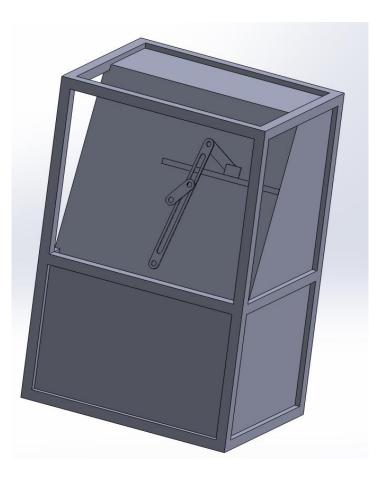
Isometric View of CAD model showing the quick return mechanism.
